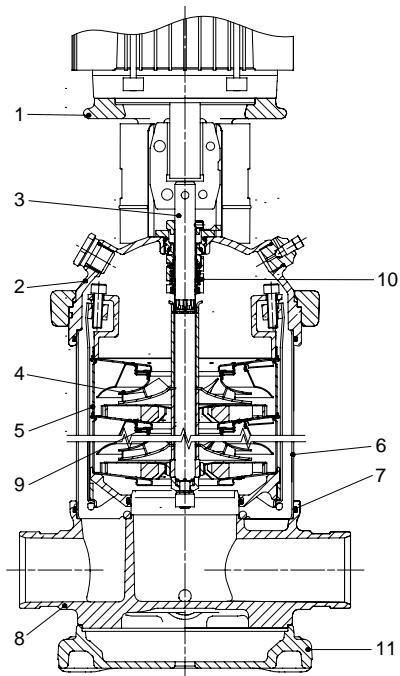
Sectional drawing of CRN 5, 10, 15, 20 SF
